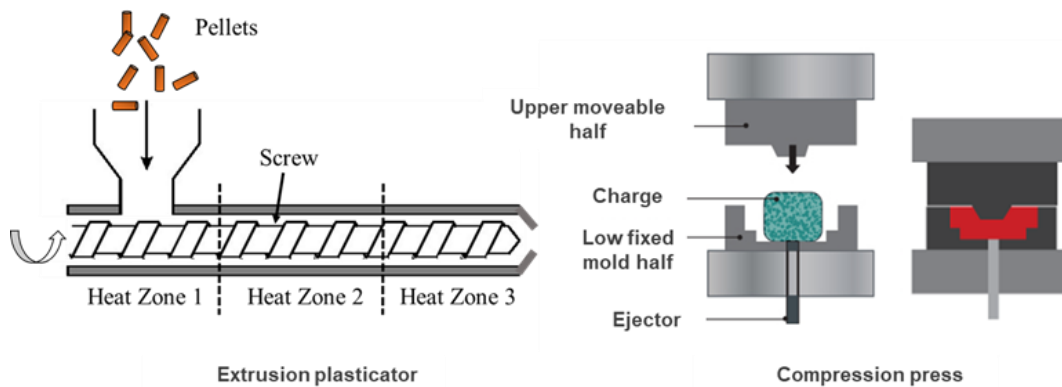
Schematic of the ECM process. LFT pellets fed through feeder, plasticated into heated barrel, hot charge extruded, placed into mold and molded into the part.
